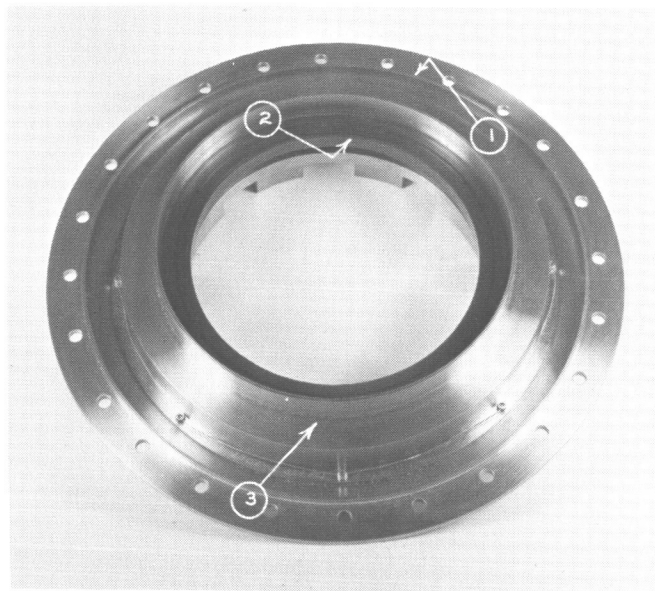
Mainshaft Seal Rig 29360 B. Build 1. Stein Seal Company Orifice Compensating Hydrostatic Face Seal With Piston Rig Secondary. Note: 1. Carrier. 2. Seal Ring Assembly. 3. Assembly Guard. XP-66913
